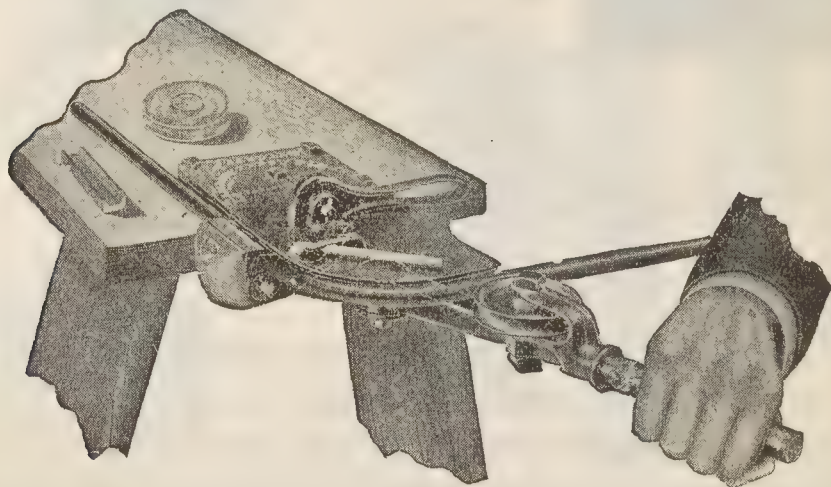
,282.—Machine for making quarter bends. This type of a tool should be used on large jobs where a number of bends the same size is desired.
